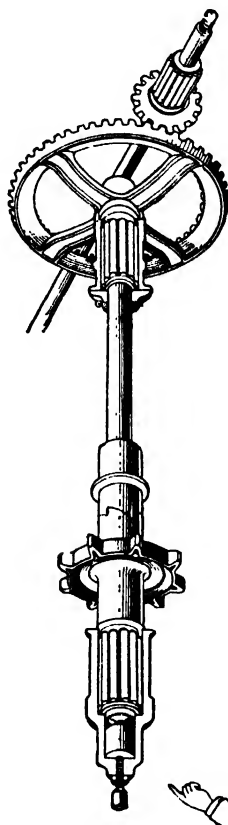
The first motion shaft of a Massey-Harris binder showing the adjustment for keeping the bevel gears in mesh, and the dog clutch
